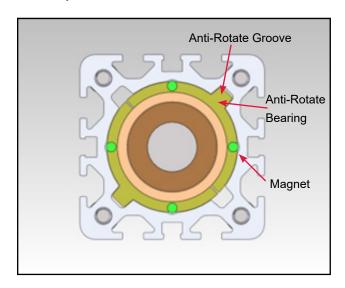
Anti-Rotate Bearings can be placed into the anti-rotate grooves using any orientation. See Actuator Reassembly in Section 3.8 Disassembly & Reassembly Procedure to see how shims play a role in orientating the Anti-Rotate Bearings into the anti-rotate grooves.
